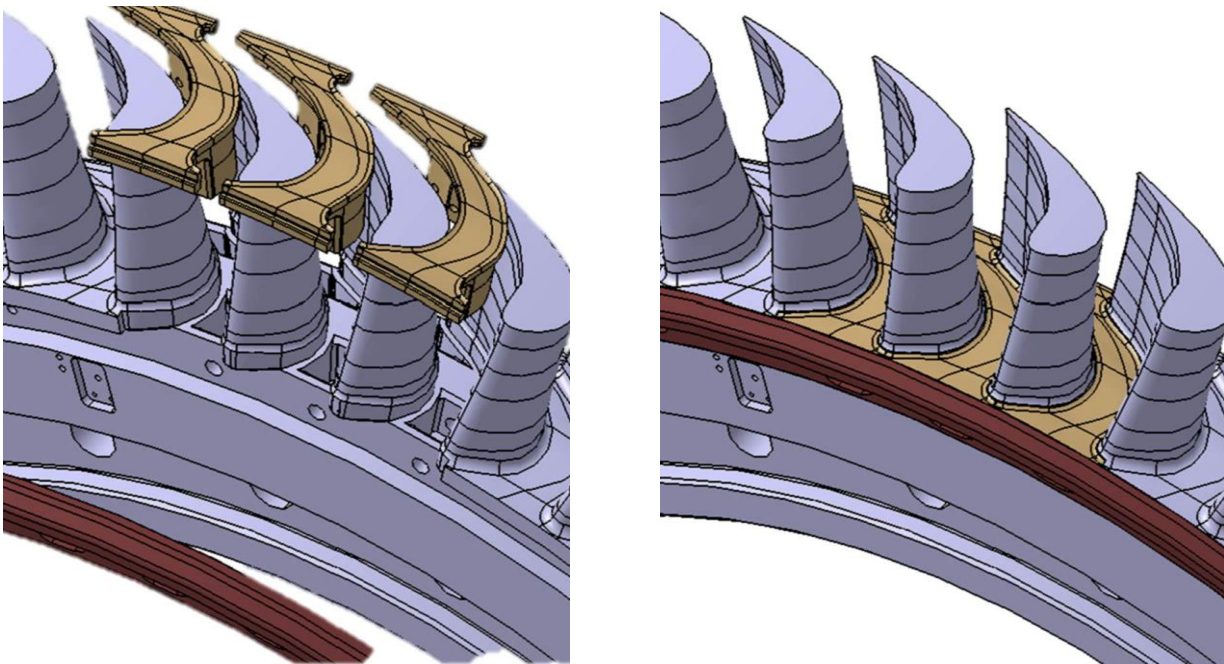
left, exploded view of the main structural components of the blisk assembly: blisk (grey), heat transfer platform inserts (brown), rim seal cavity retaining ring (dark red). Right, assembled components.
